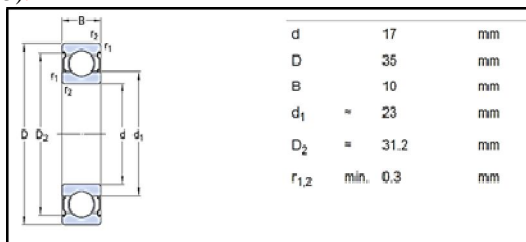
Dimensioning of Ball Bearing Considered for the Study
